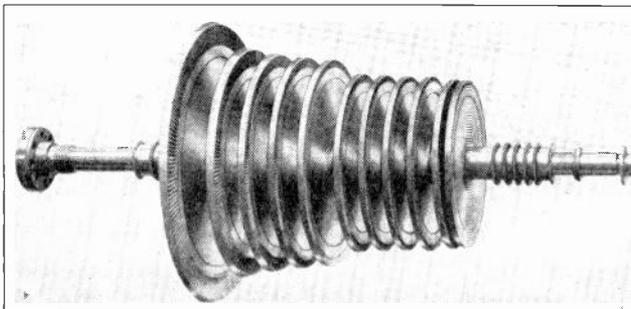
Complete rotor of a modern steam turbine, showing several sets of moving blades through which the steam passes in succession. Courtesy of Elliott Company.
